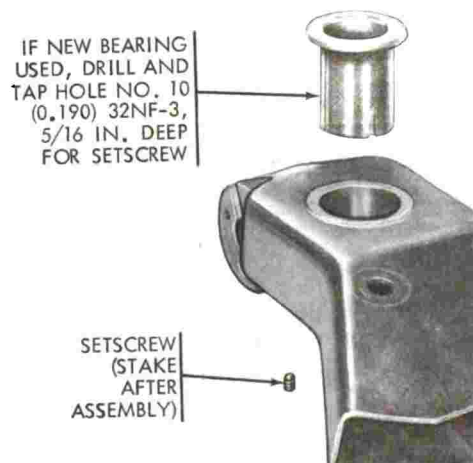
Disassembly/assembly of upper elevating screw and elevating handwheel group.
